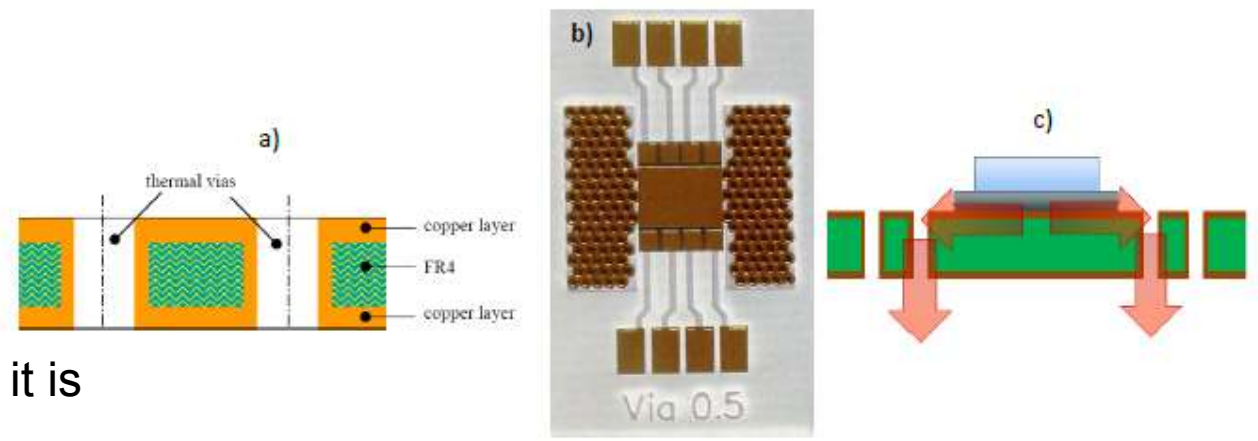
PCB with open thermal vias: a) Scheme; b) design; c) thermal path
